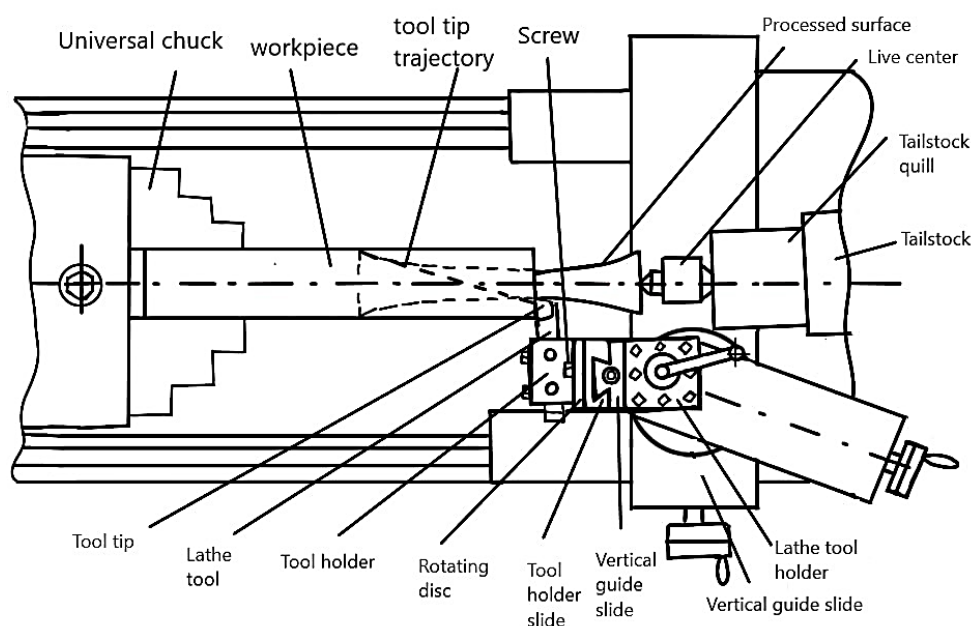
The proposed device for obtaining a single-sheet hyperboloidal surface by turning, under the conditions of mounting the device on a universal lathe.
